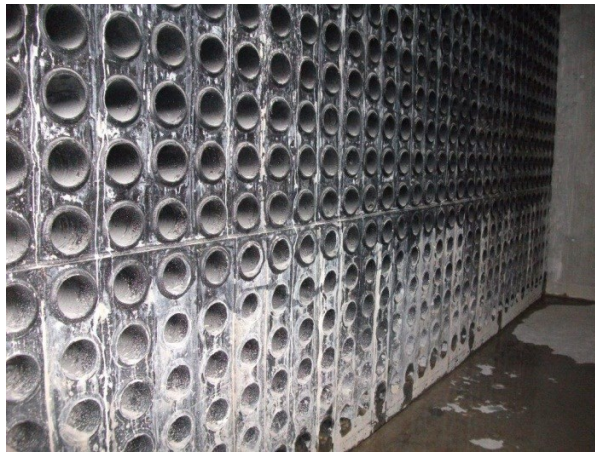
Return chamber construction showing completed arrangement of pipes (one bank)
